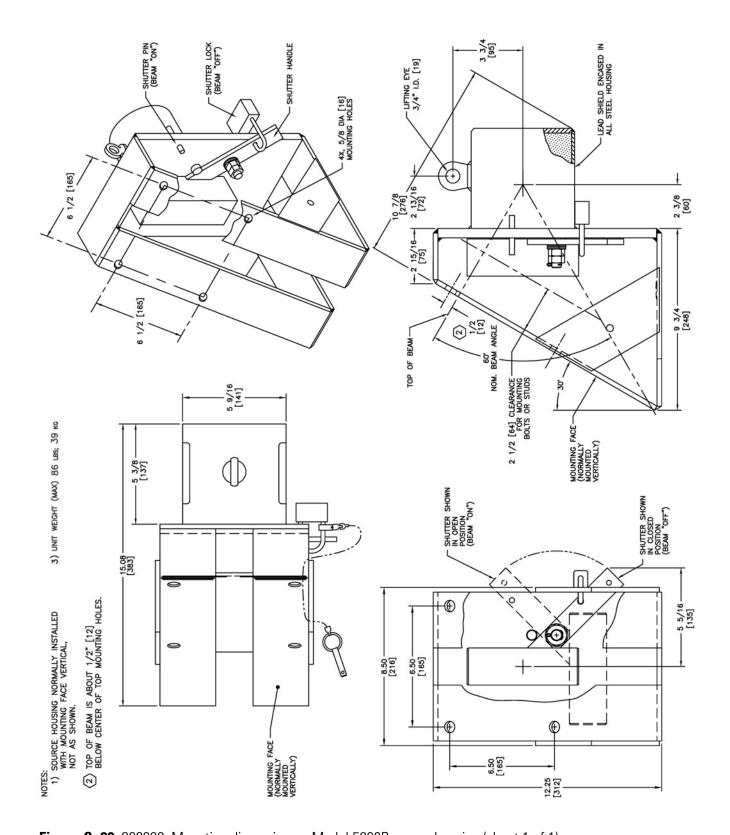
868629: Mounting dimensions - Model 5206B source housing (sheet 1 of 1)
